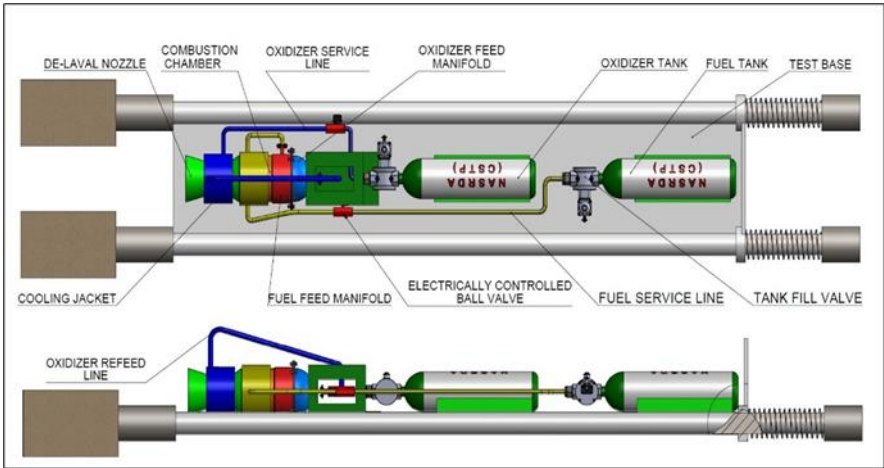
CAD of the Liquid rocket engine assembled on test stand
